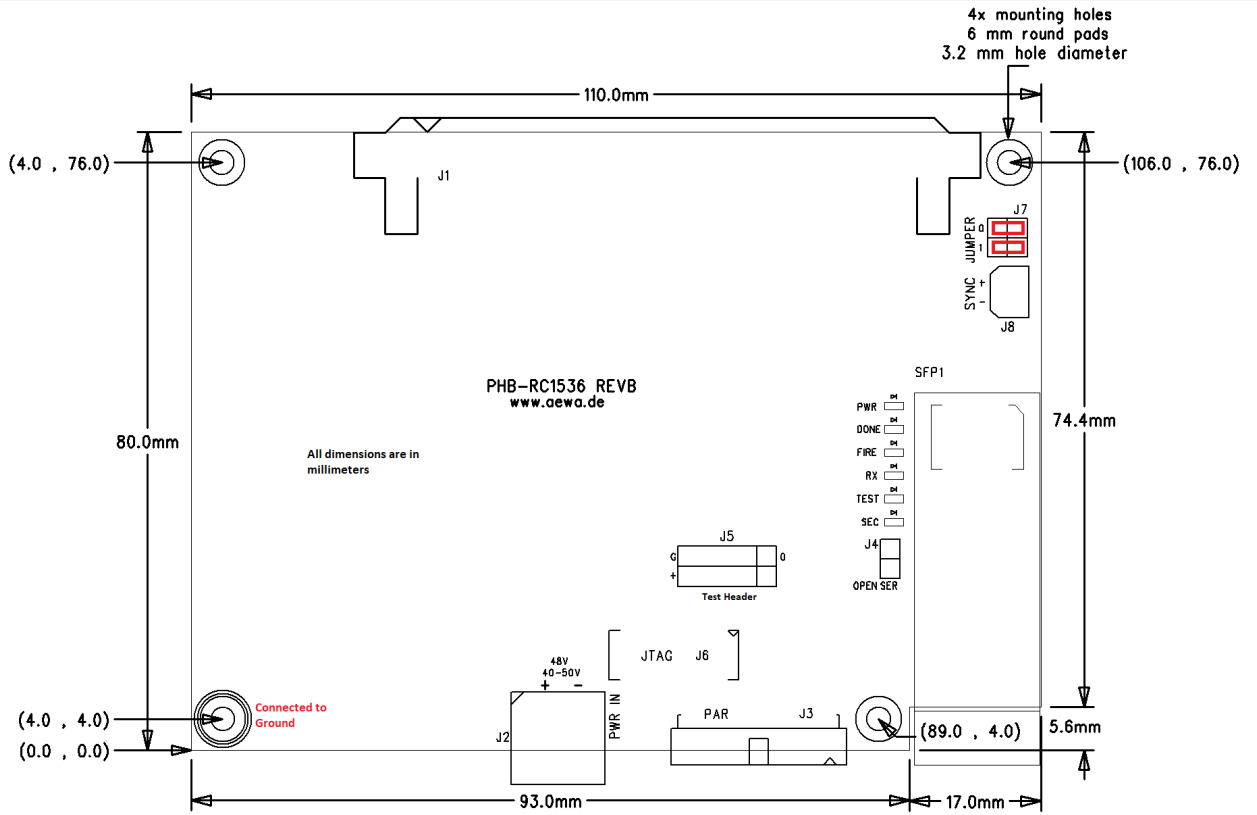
PHB-RC1536 MECHANICAL DIMENSIONS
